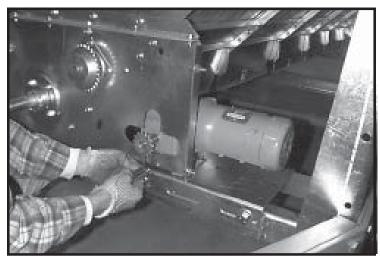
Slide meter roll sprocket on meter roll shaft.
